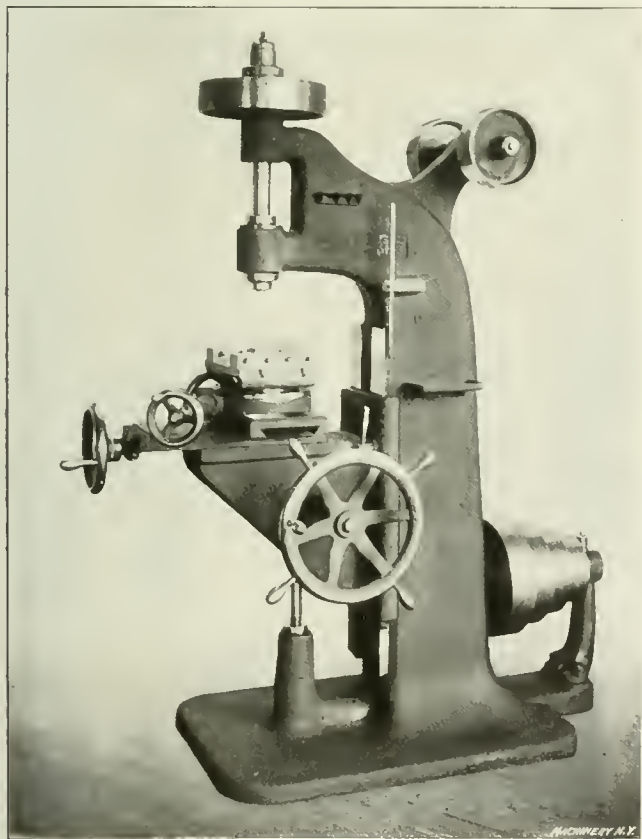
The Pratt & Whitney No. 2 Die-sinking Machine
